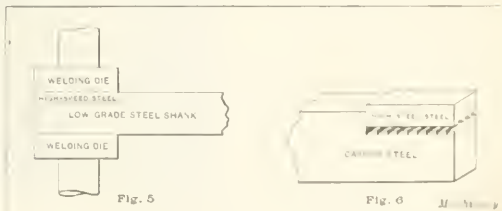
Position of Parts to be welded relative to Welding Dies
